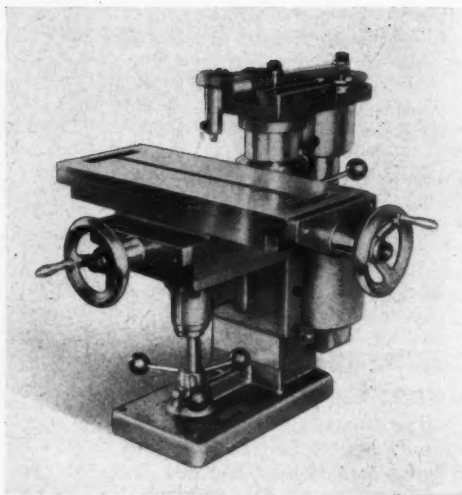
The Arboga universal machine is here arranged for shaping, with the spindle unit suspended in an inverted position at the rear
